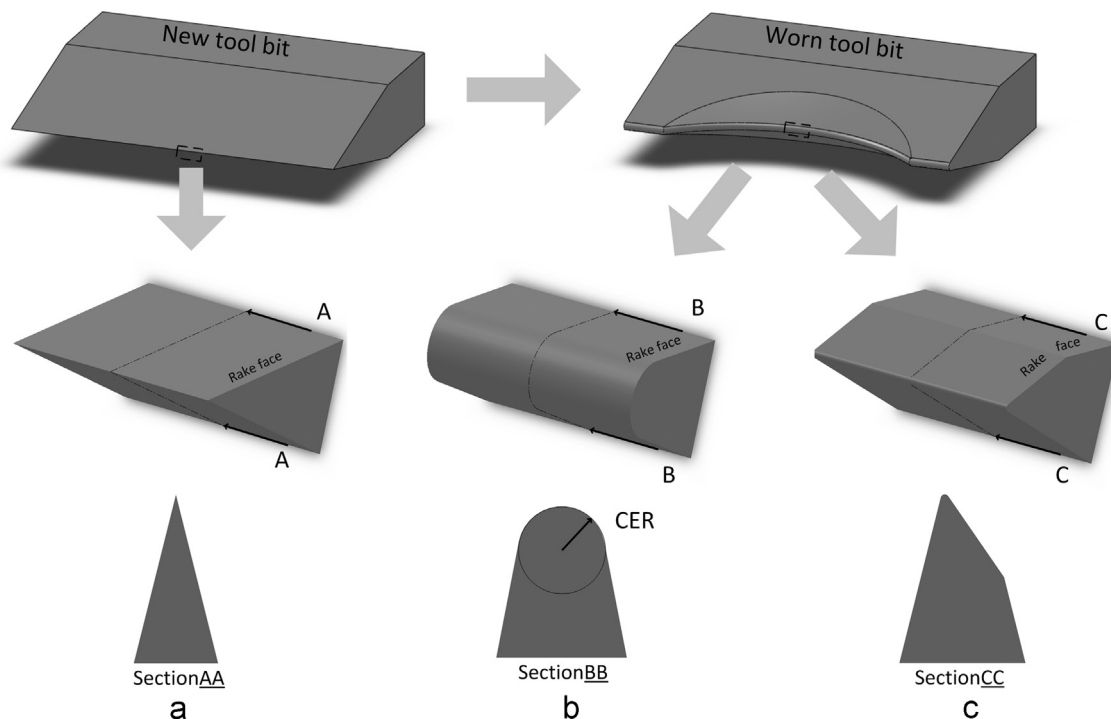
Cutting tool wear at one cutting position: (a) new cutting edge, (b) cutting edge rounding and (c) rake face wear.
